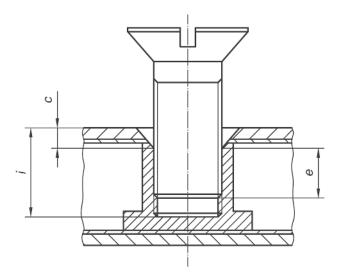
Illustration of screw thread engagement, insert well depth and countersink depth
